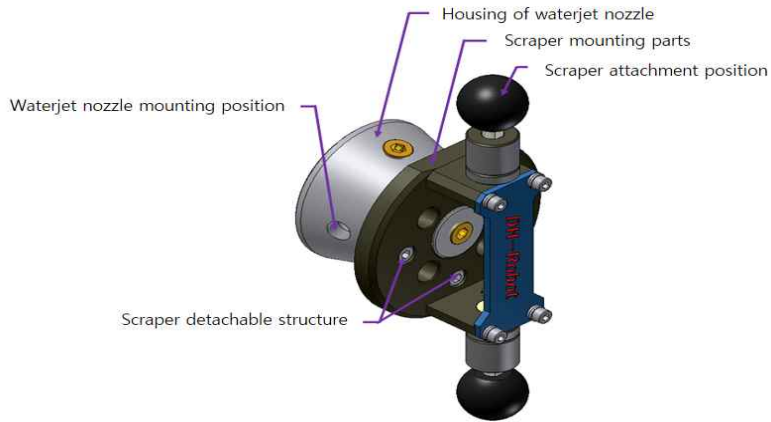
Configuration of the injection nozzles and the scraping tools
